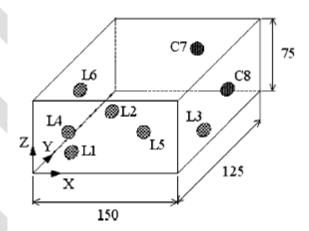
Scheme of 3-2-1 fixture setup [1].
